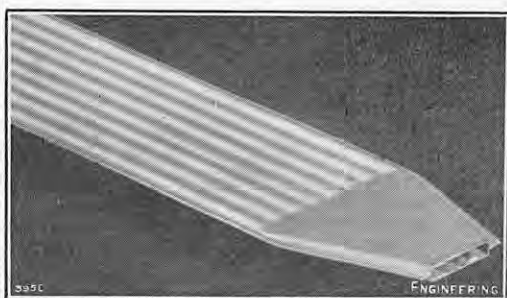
TWO PLATES WELDED TOGETHER TO FORM AN ELEMENT.
